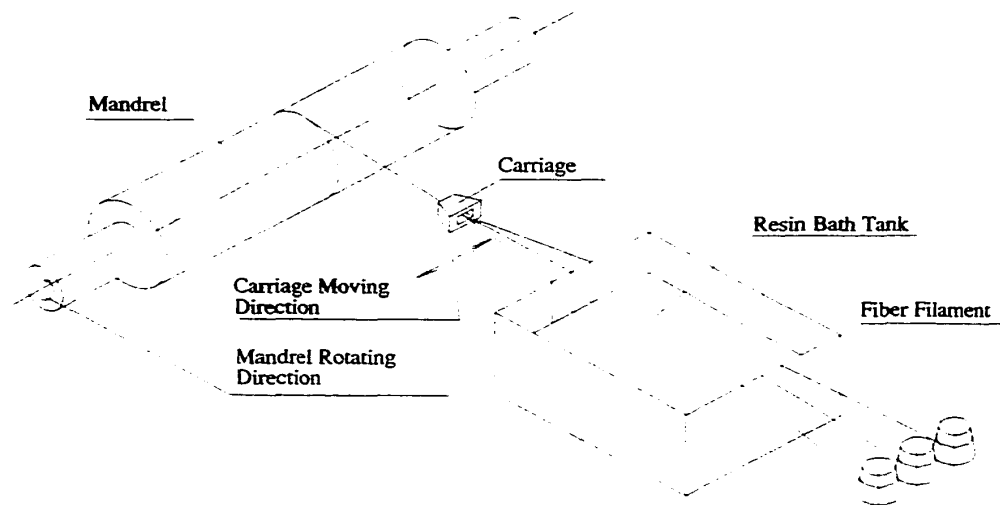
a CLM deposition principle like the filament winding machine.
